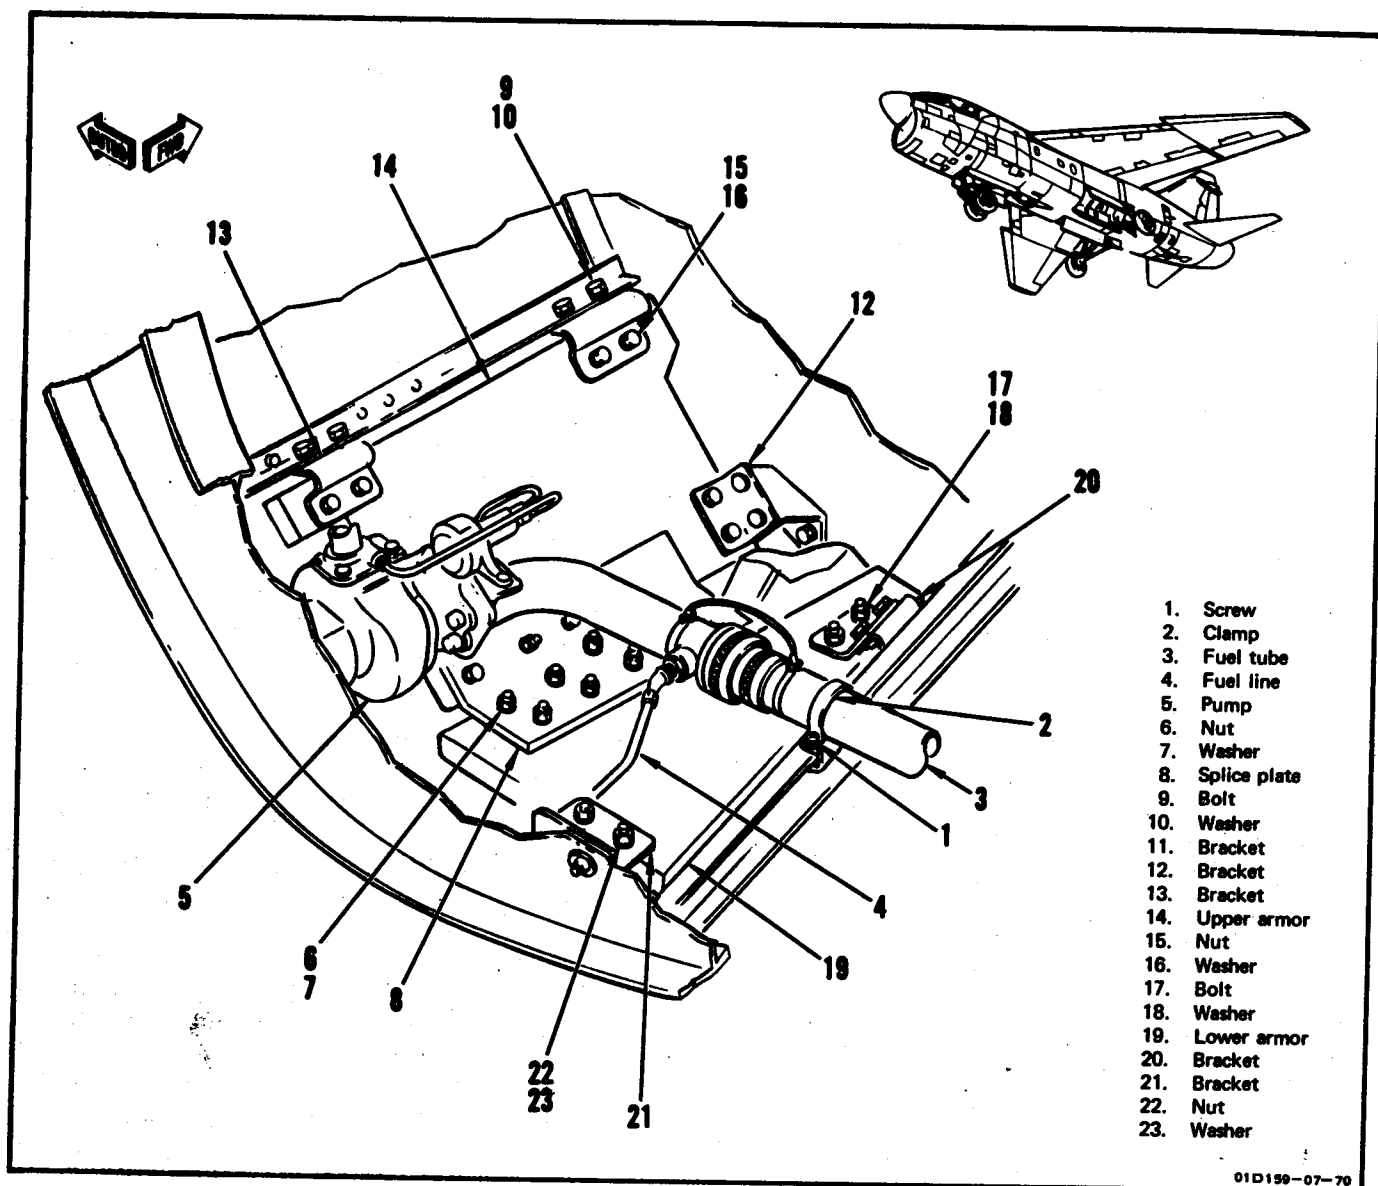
Lower Armor Plate (FS 526 to 552) Removal and Installation
